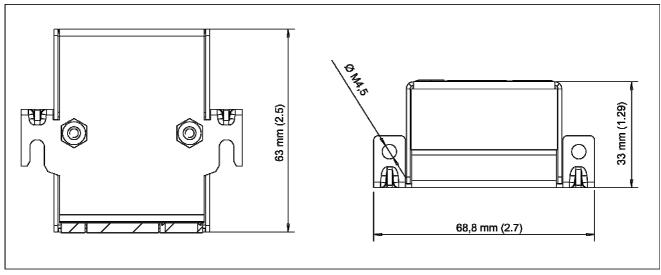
Dimension drawing of Safe Brake Relay, all data in mm and (inches)
